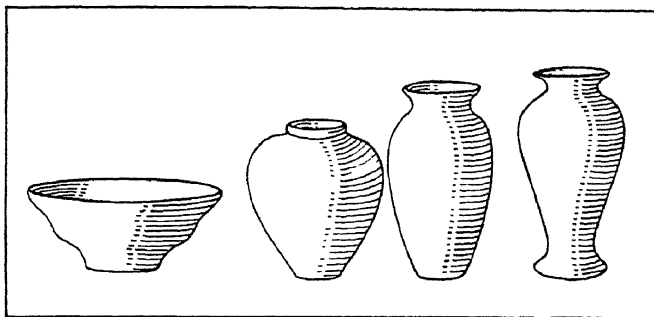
Progressive steps in mold making. The low bowl is a one-piece mold; the second form is a two-piece mold, and the last two are three-piece molds.
